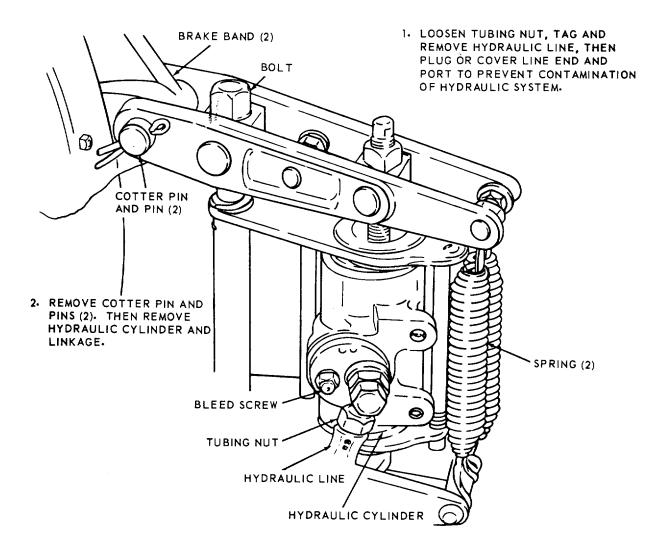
Hydraulic clutch cylinder, removal and installation.
